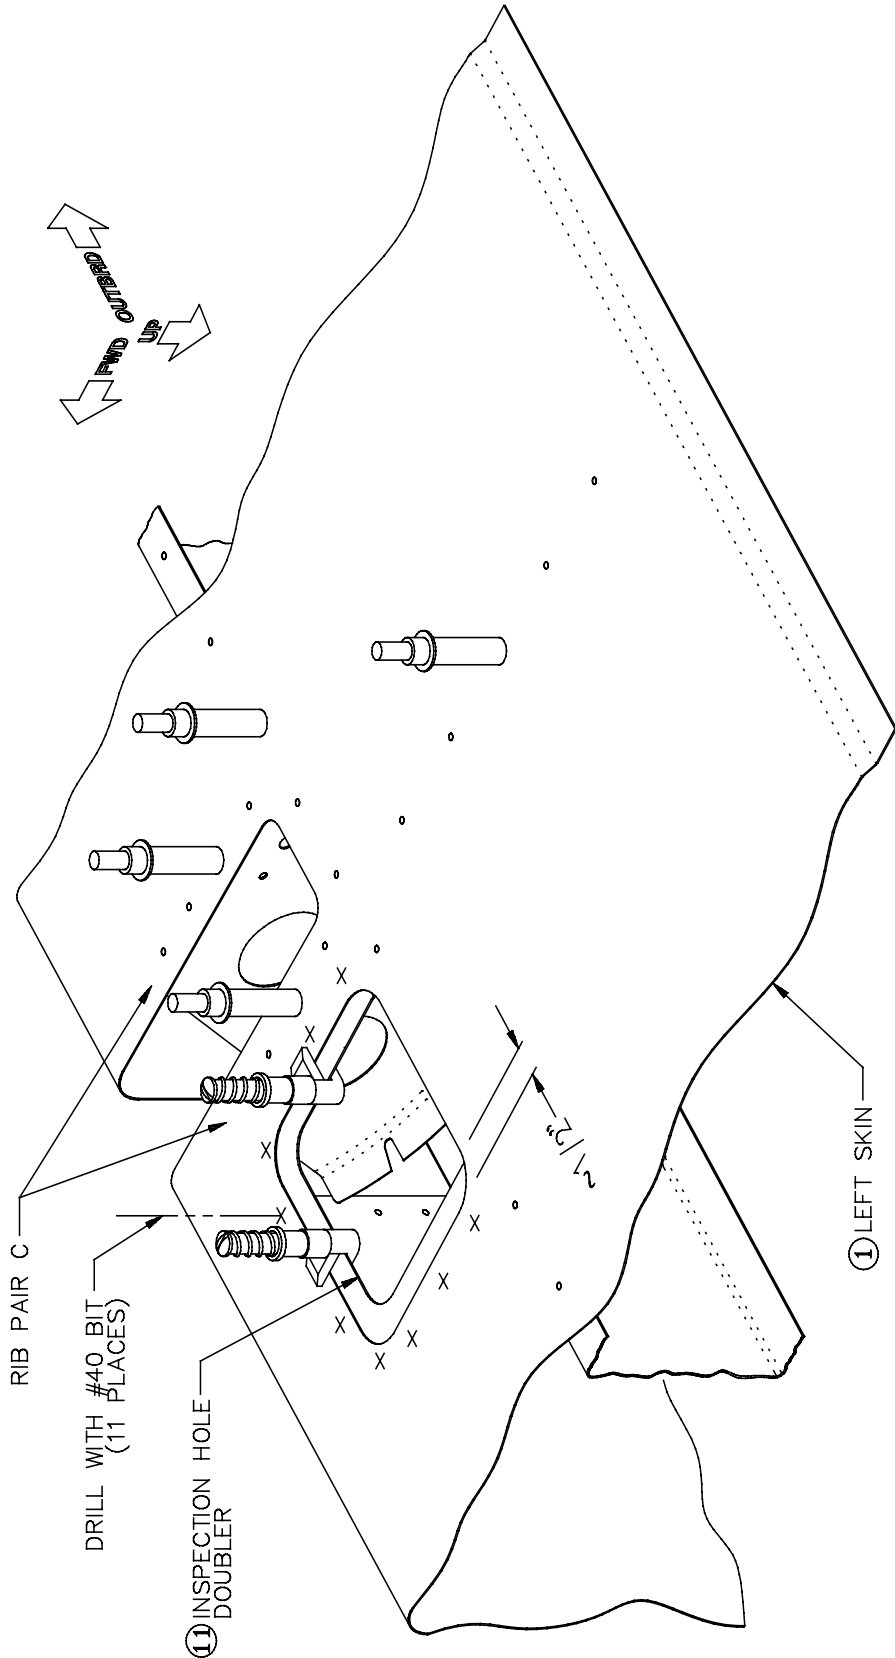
Drilling the Inspection Hole Doubler Rivet Holes
